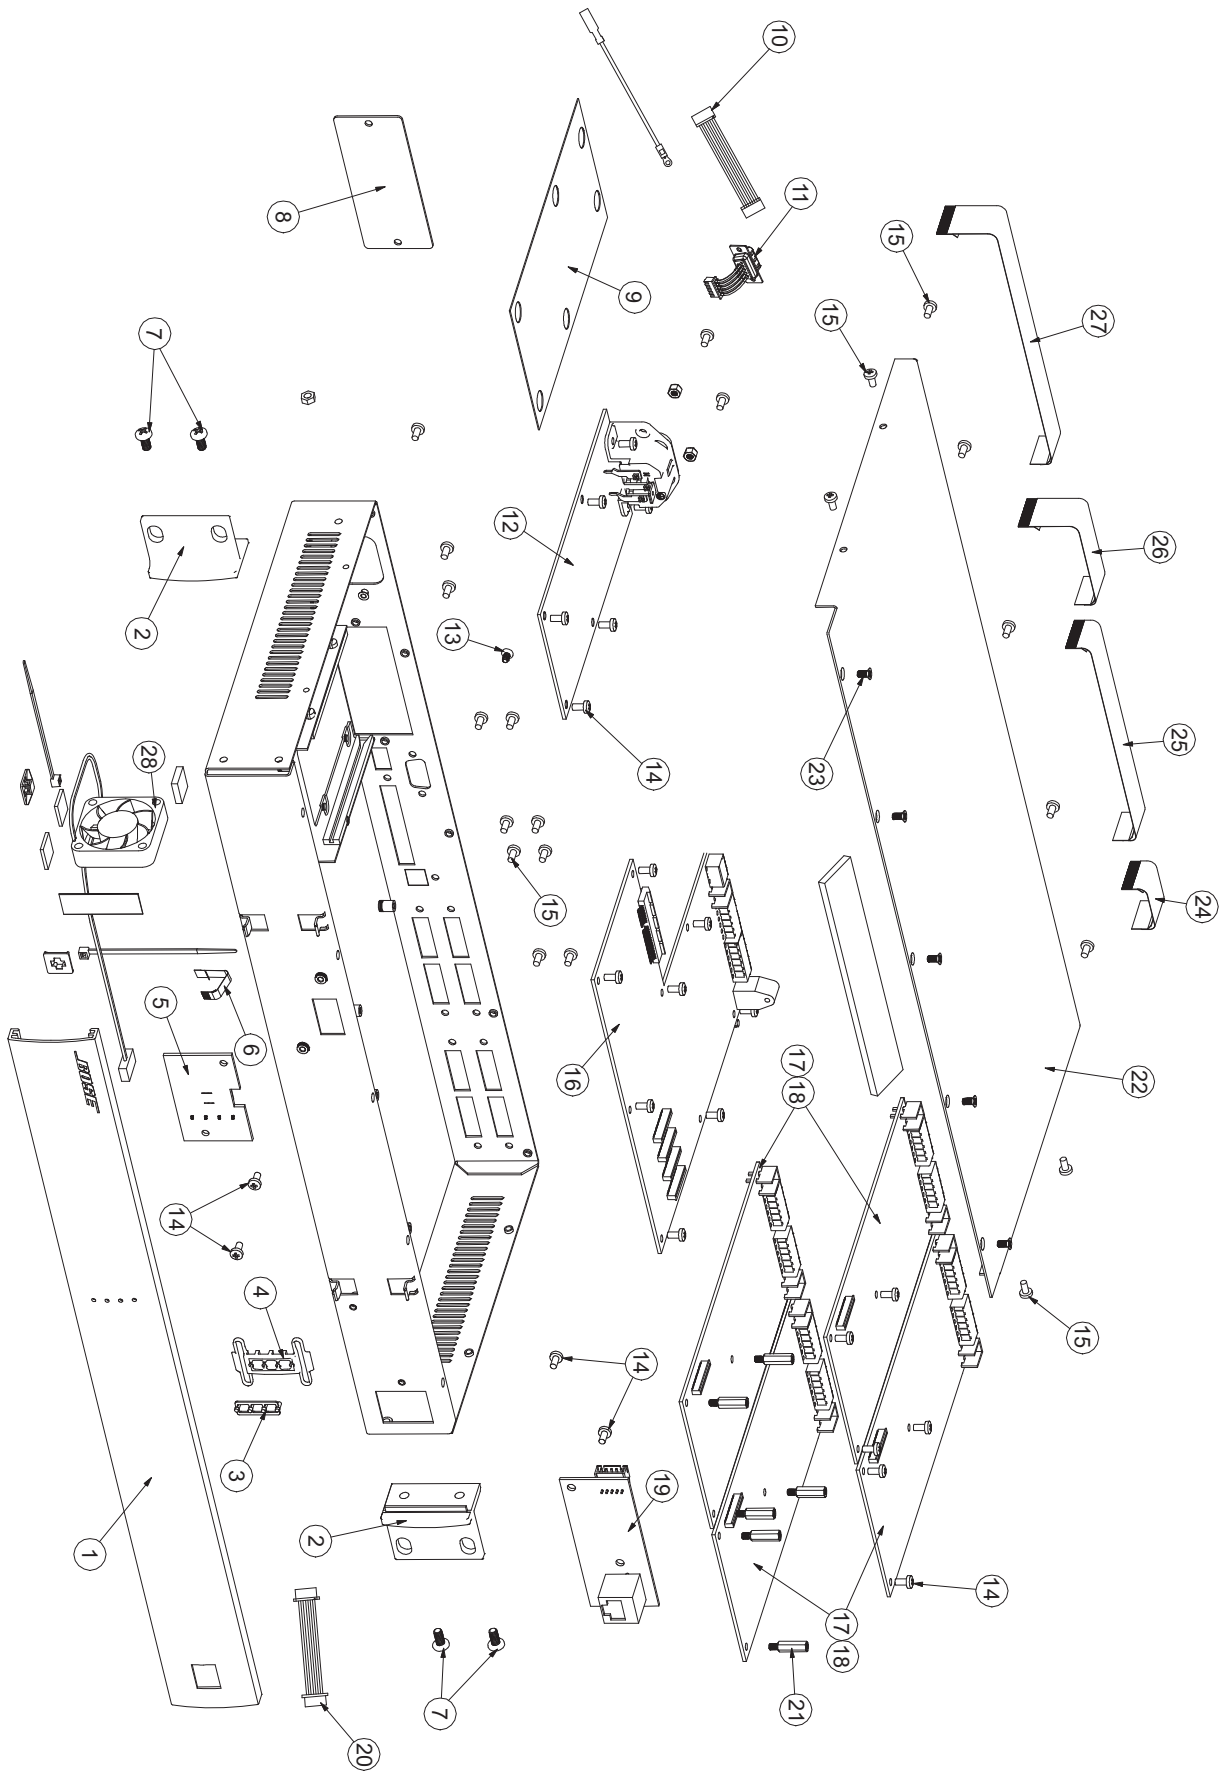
ControlSpace® ESP-880, -1240, -4120 and -1600 Chassis Exploded View
